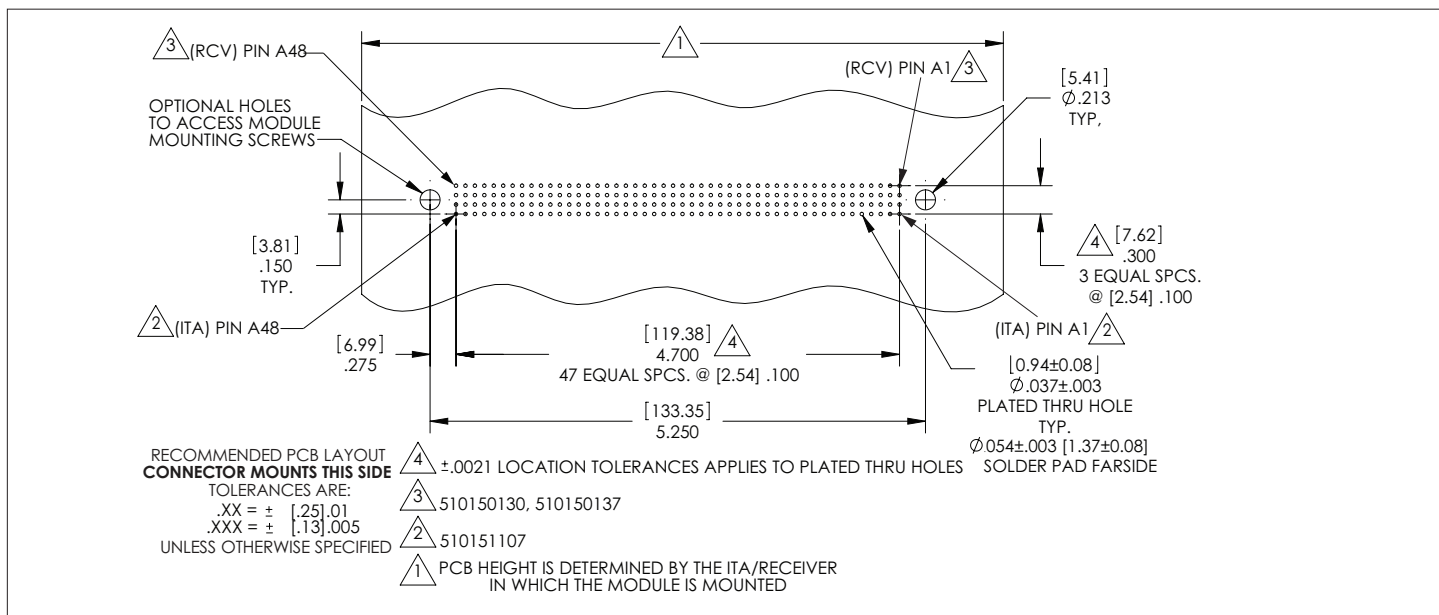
Figure C. Recommended PCB layout for modules 510150130, 510150137, and 510151107.
